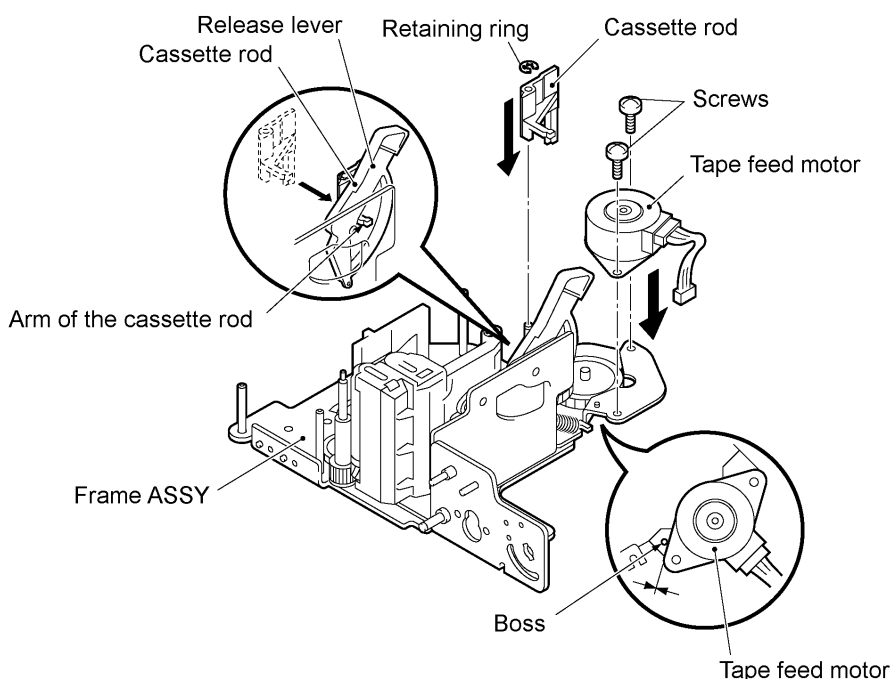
Installing the Cassette Rod and Tape Feed Motor
